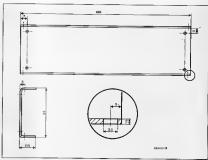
Construction details of the aluminium bracket that holds the PCB.
